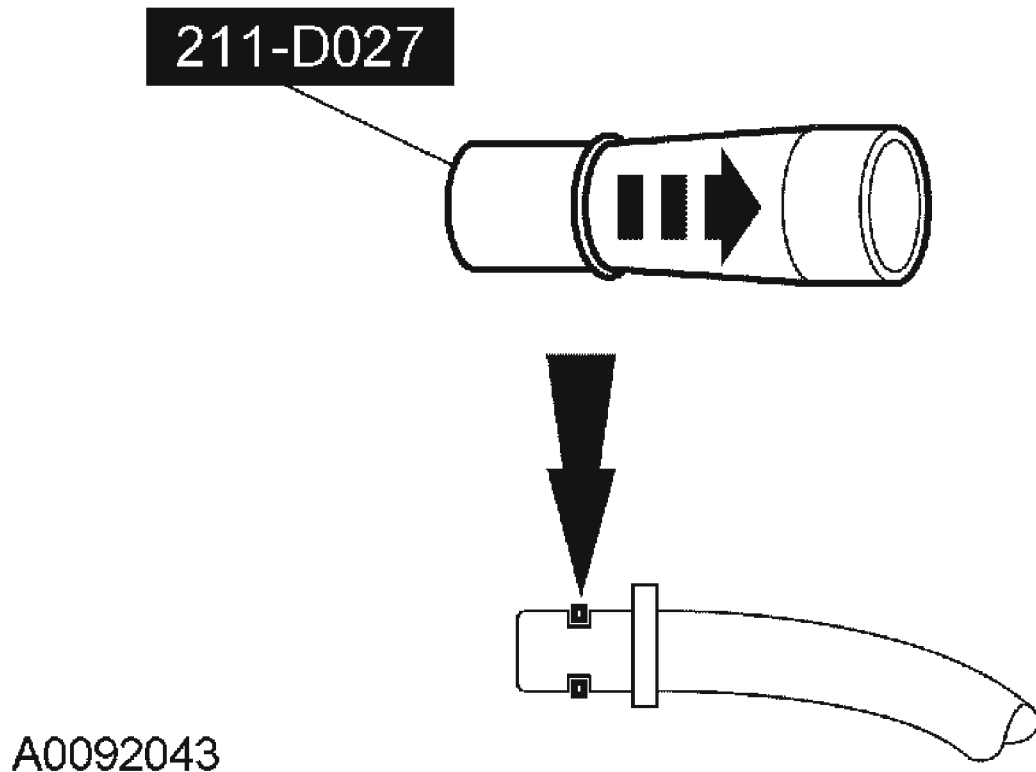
Installing Pressure Line And Return Line O-Ring Seal Using Special Tool
